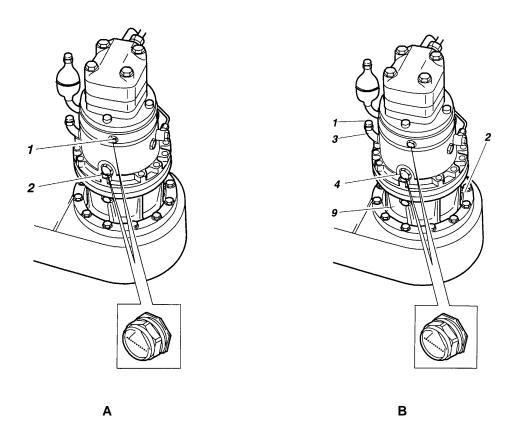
Rotate Drive Gearbox Fill Points and Sight Glass
